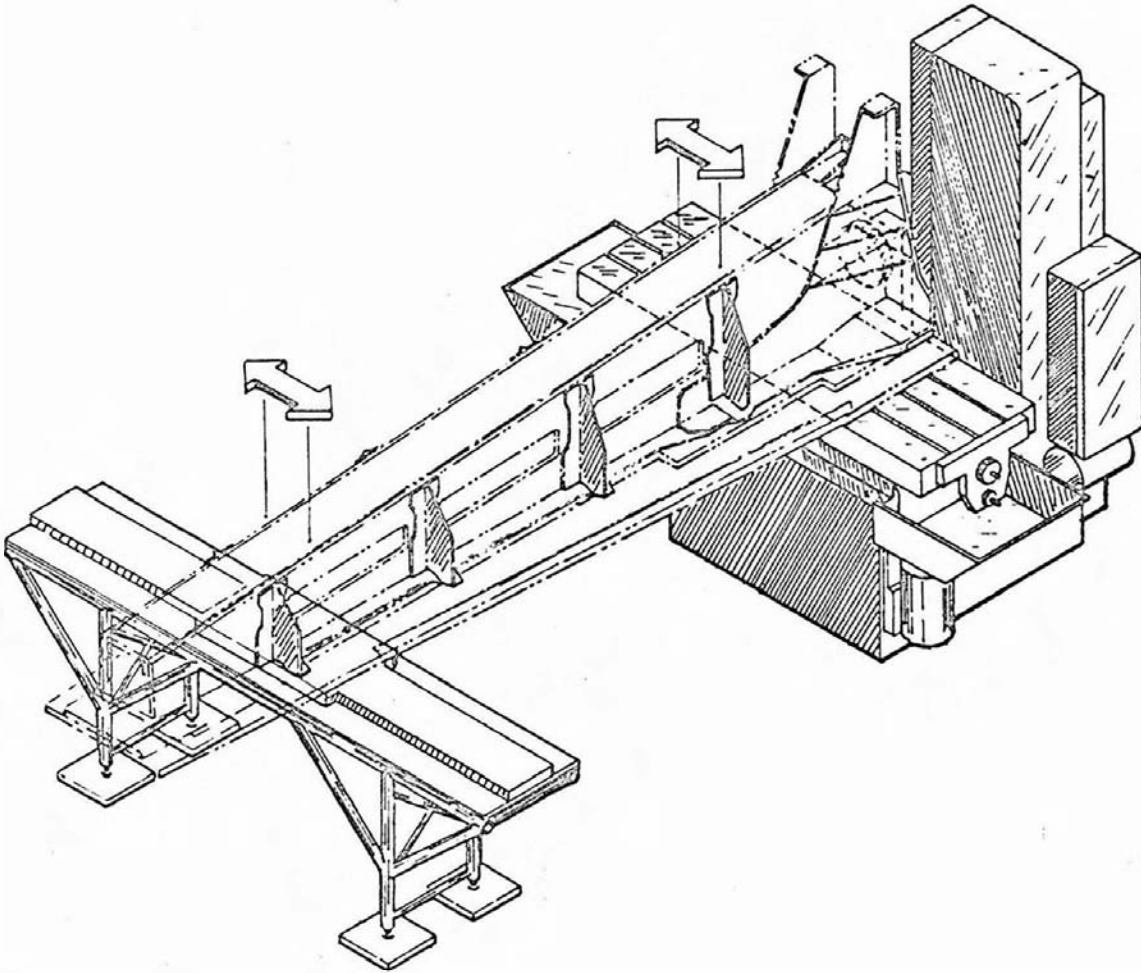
Outboard Thrust Post Assembly Mill Fixture MF-335-18800
